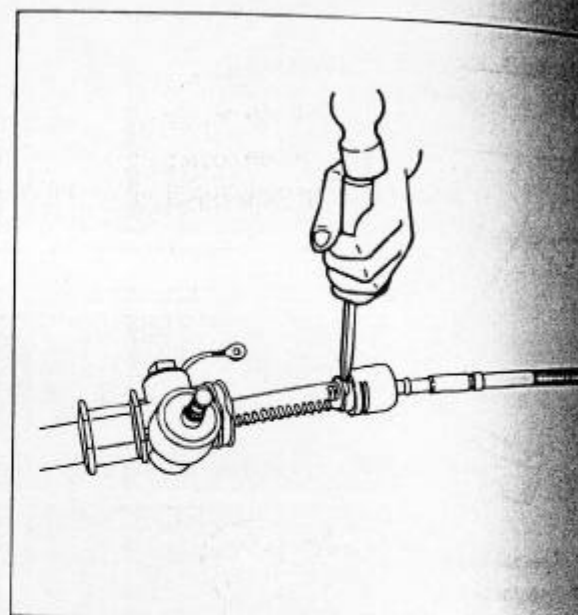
B — 15 ASSEMBLING STEERING TIE ROD
